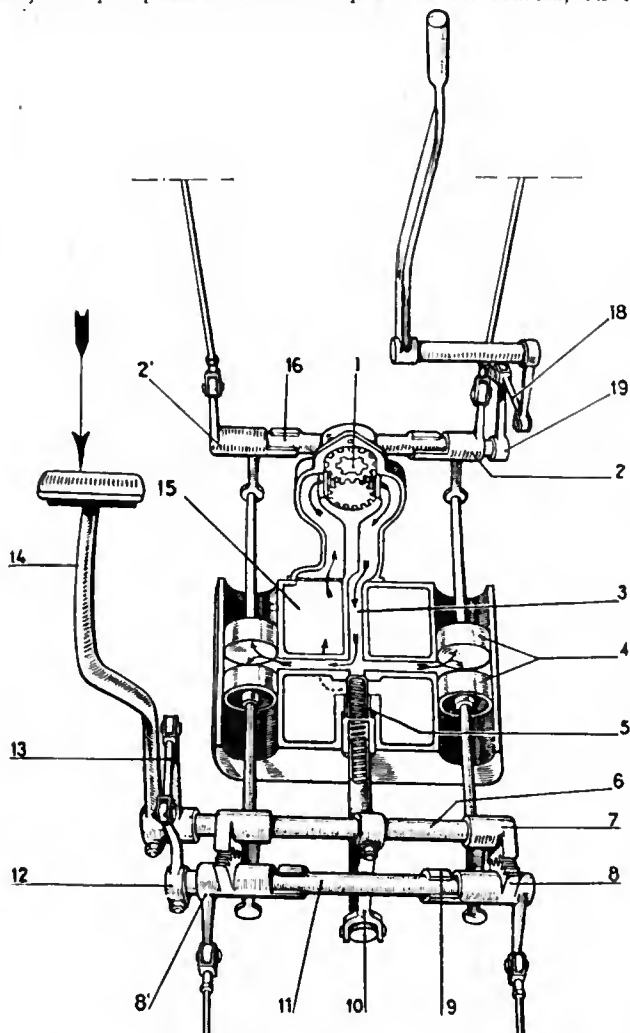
Diagram of Fiat hydraulic servo brake: 1, gear type oil pump; 2, 2', floating levers in front wheel brake linkage; 3, delivery passage of pump; 4, servo pistons; 5, servo control valve; 6, brake pedal shaft; 7, gear sector on brake pedal shaft; 8, 8', gear sectors on floating levers in rear wheel brake linkage; 9, nose on shaft 11 which engages with corresponding nose on hub of floating lever; 10, lever on brake pedal shaft to which servo control valve is connected; 11, cross shaft connected to brake pedal through lever 12 and link 13; 14, brake pedal; 15, oil by-pass; 16, cross shaft operated from brake hand lever through link 18 and lever 19.
